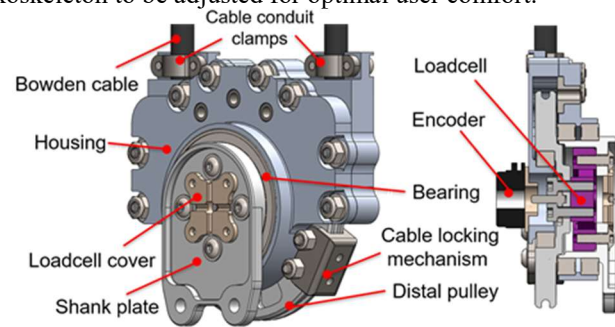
A section view (left) and an isometric view (right) of the cable-driven knee mechanism that actuates both knee flexion and extension. It is composed of two cable conduit clamps, a distal pulley, a housing to enclose internal components, a load cell cover, a shank plate, a cable locking mechanism (it also prevents knee hyperextension), a ball bearing, an encoder, and a custom load cell that measures up to 50 Nm torque.
